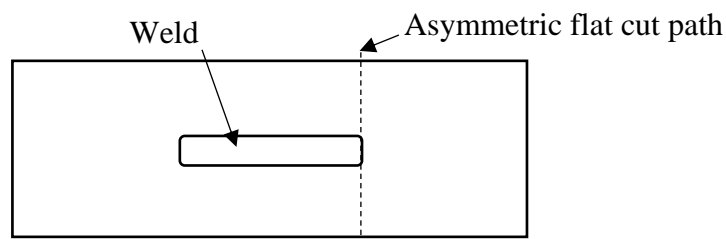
Example of a plate with a central weld where the asymmetric cut path passes by the edge of the weld giving asymmetry of geometry, stiffness and residual stress field.
